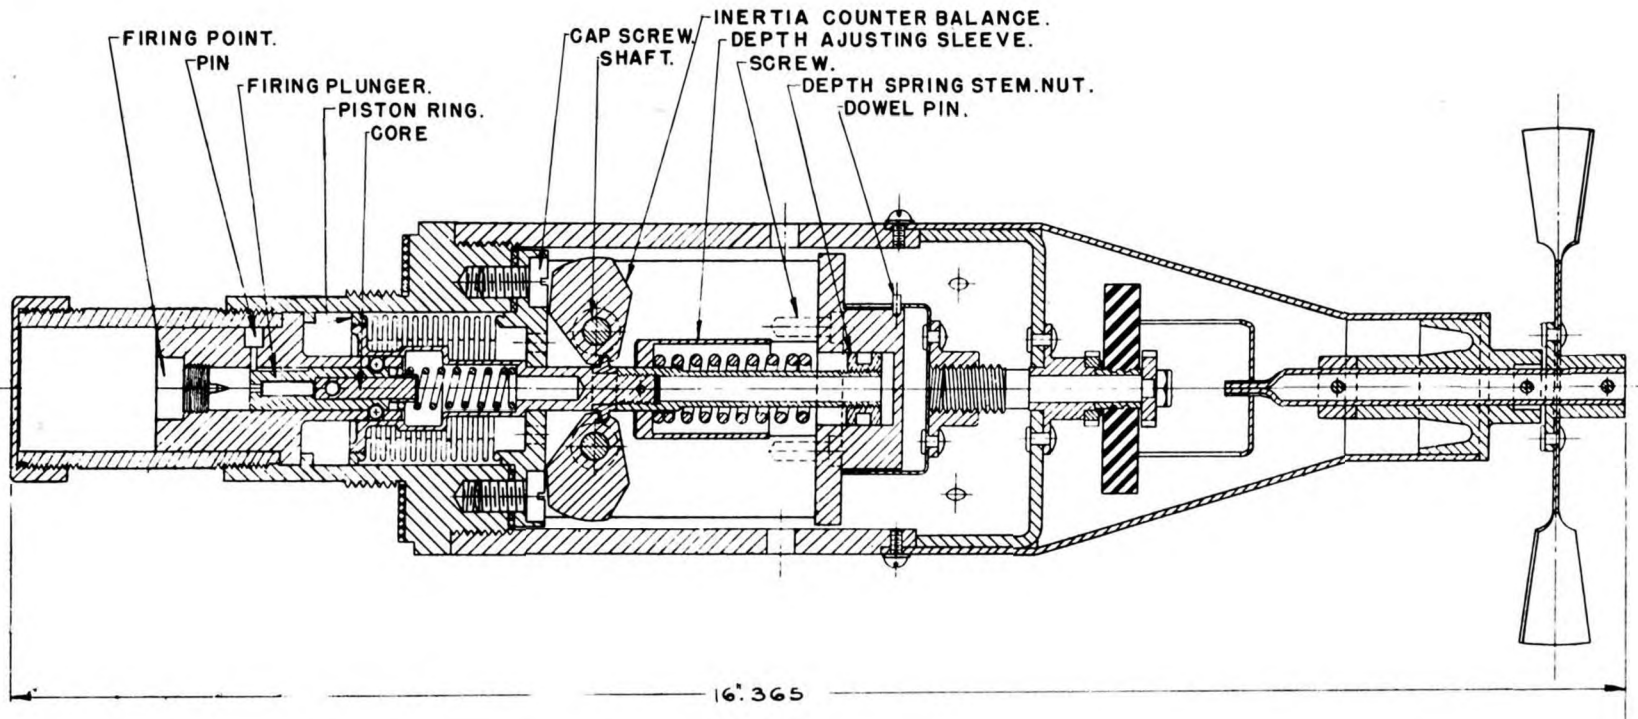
FUZE, BOMB, TAIL, HYDROSTATIC — MARK 229: GENERAL ARRANGEMENT DRAWING. (UNARMED POSITION).
